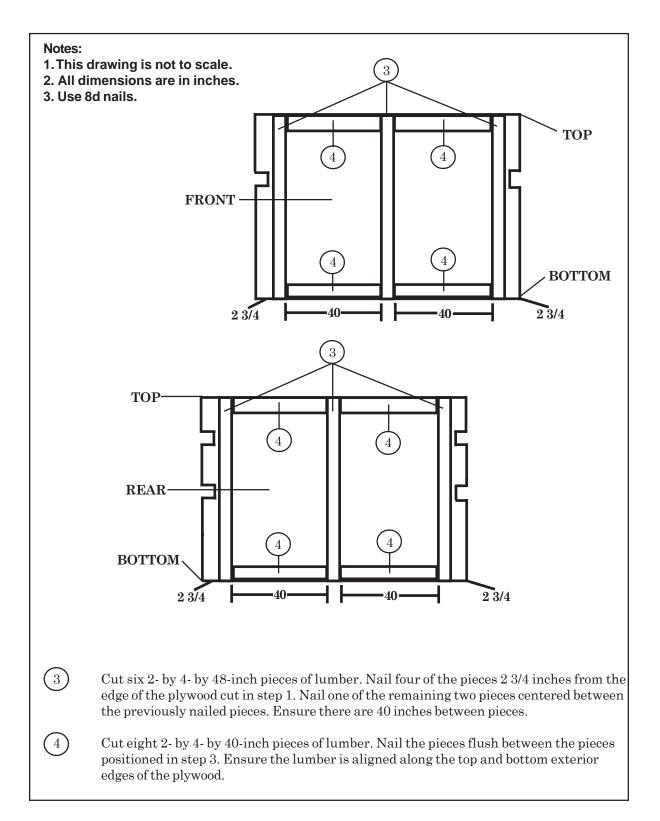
Equipment Box 3 Front and Rear Constructed (Continued)
